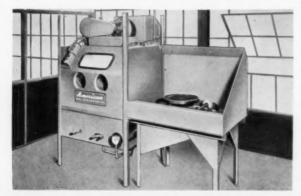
View of the Liquamatte, a new wet blast machine introduced at the National Metal Exposition by American Wheelabrater and Equipment Corp.
